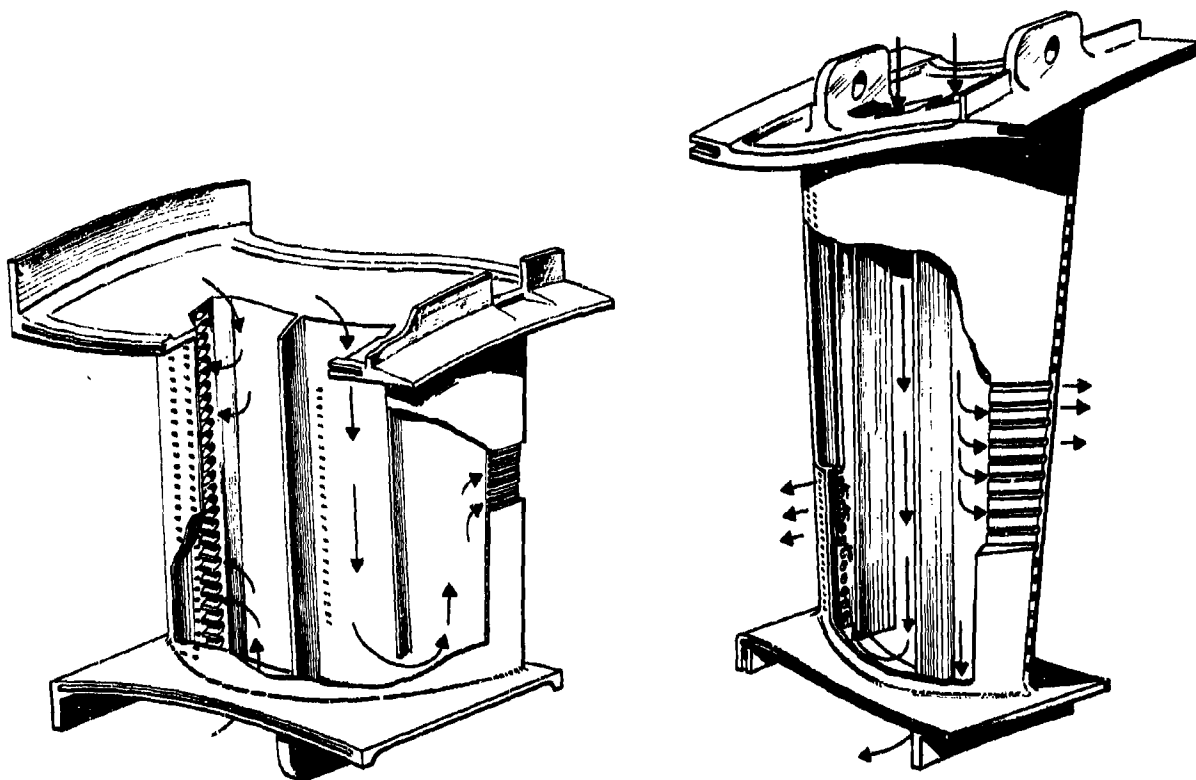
TURBINE VANE. Cutaway drawings show the interior passageway configuration and the coolant flow-path of the first- and second-stage nozzle vanes. Precision casting techniques ensure uniformity and quality of the cooled stator vane.
